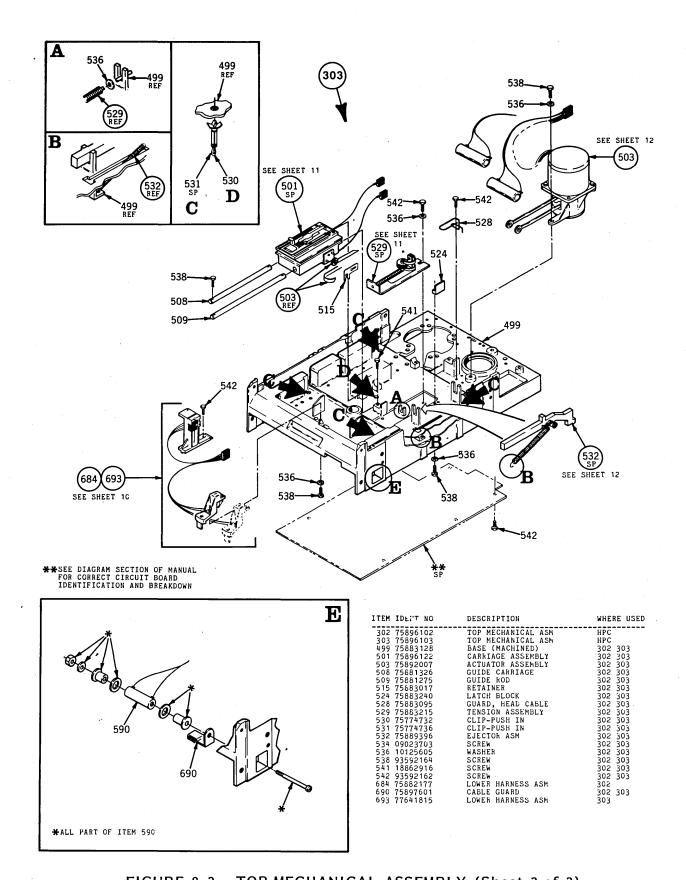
TOP MECHANICAL ASSEMBLY (Sheet 2 of 2)
